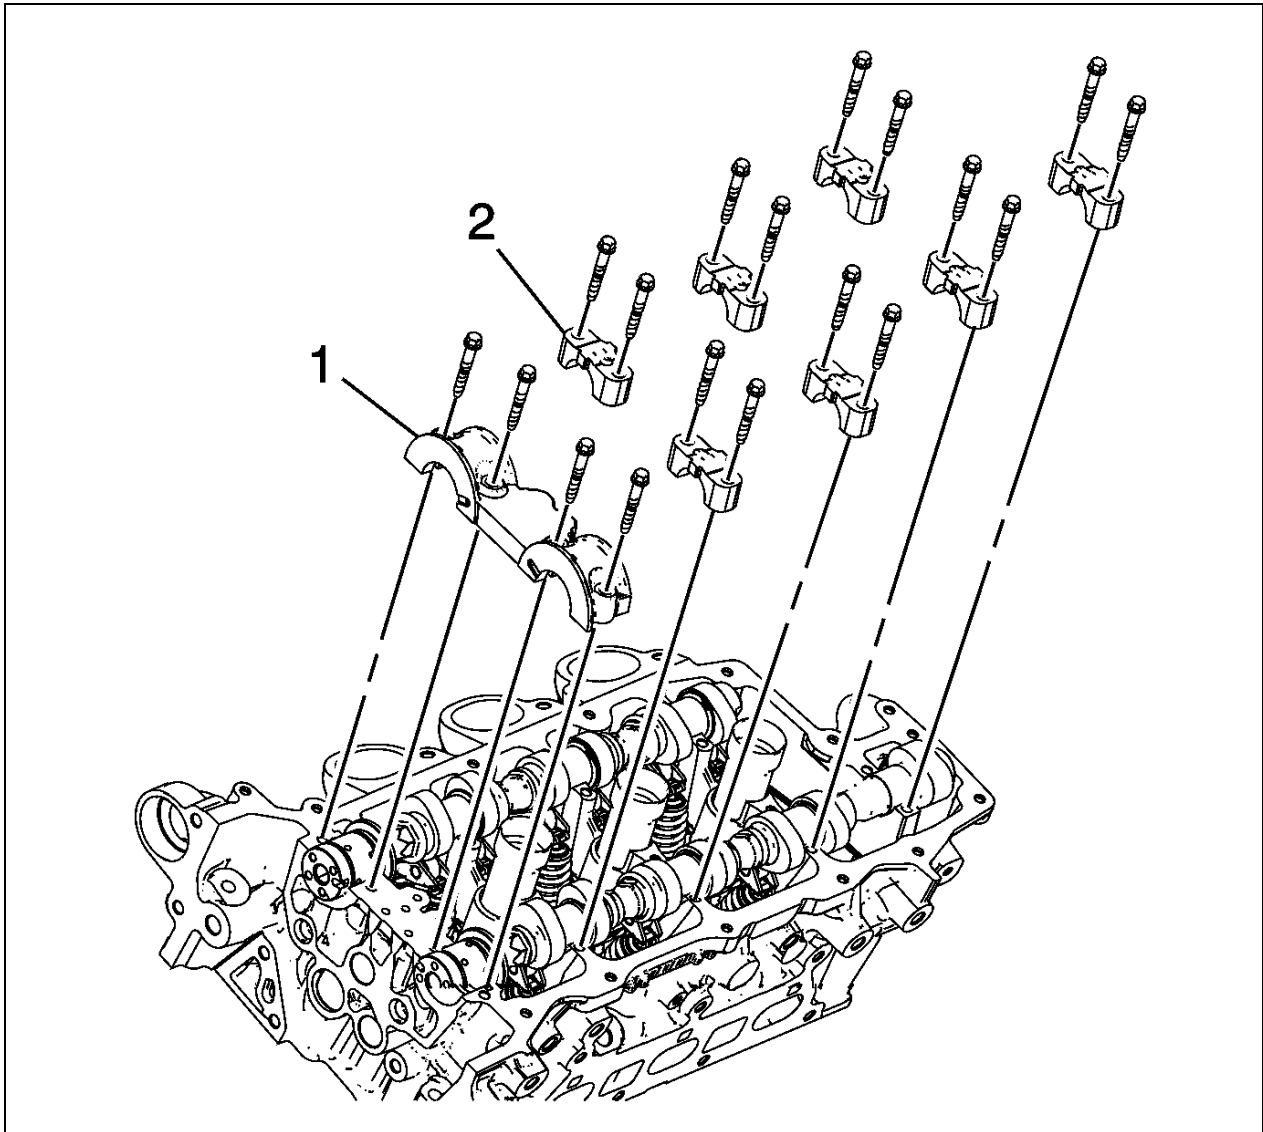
Camshaft Bearing Cap And Camshaft Thrust Surface
